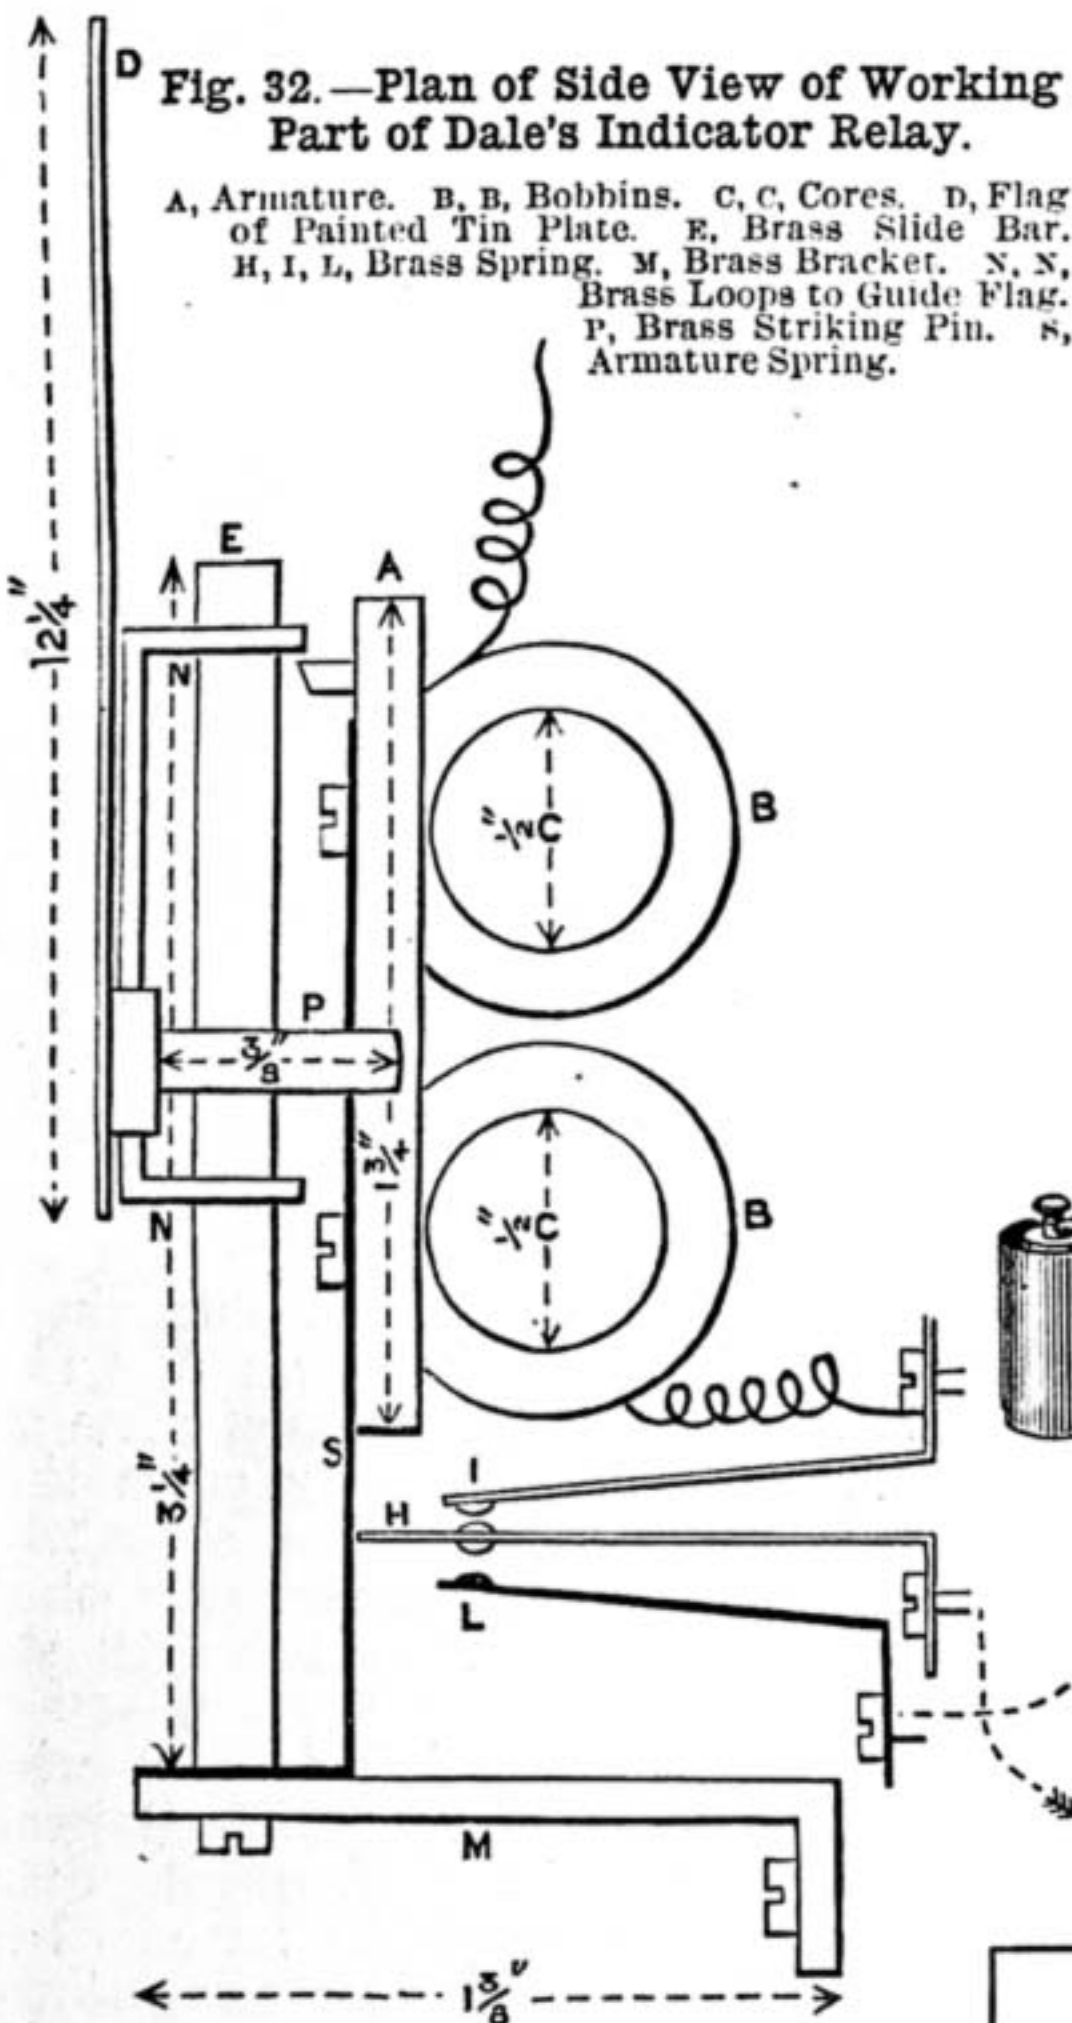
Plan of Side View of Working Part of Dale's Indicator Relay.
